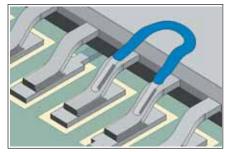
Acceptable Wire looped and soldered to adjacent component leads.
